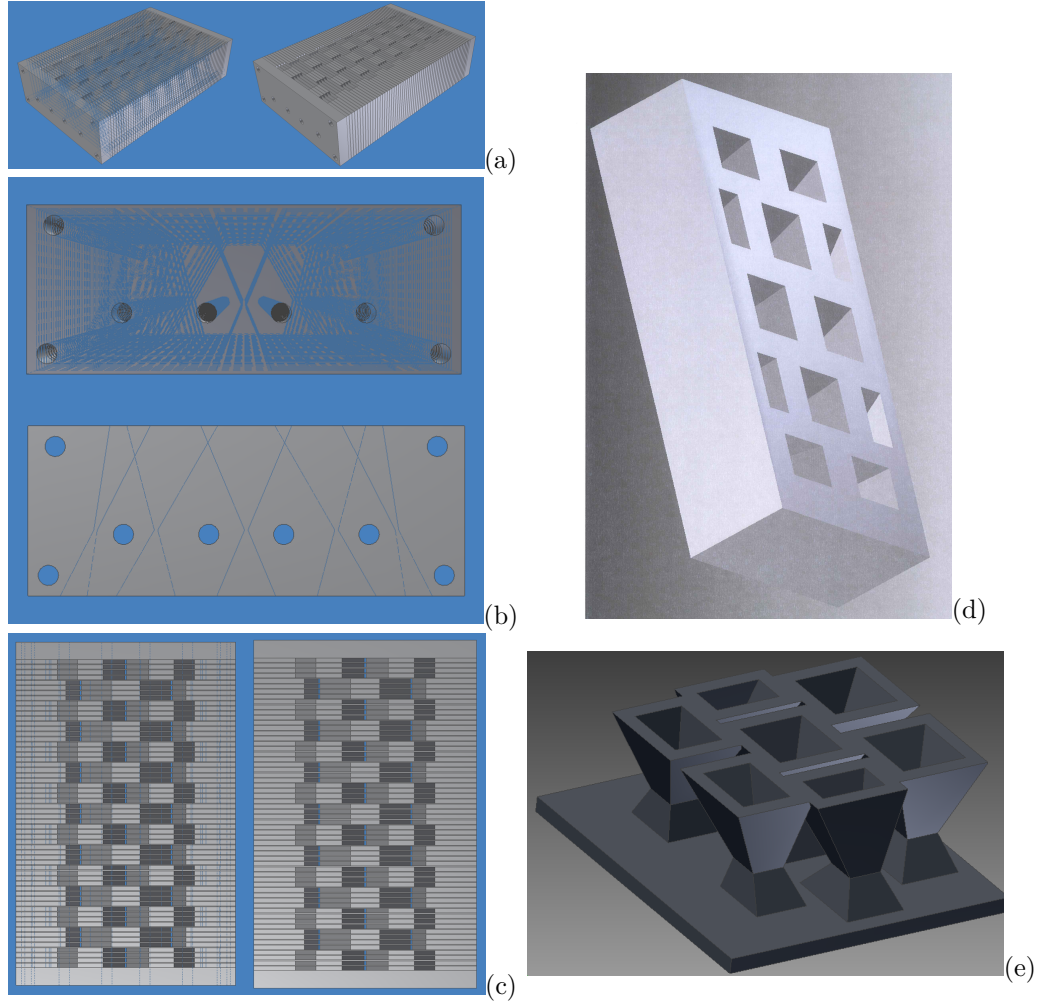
Technical drawings of the final prototype collimators: (a) perspective, (b) top/bottom and (c) front/back views of the MSS prototype collimator, (d) perspective view of the 8+4.5-pinhole prototype collimator without weight reduction, and weight reduction concept applied to half of the pinhole prototype collimator. [Adapted from NUCFI]
